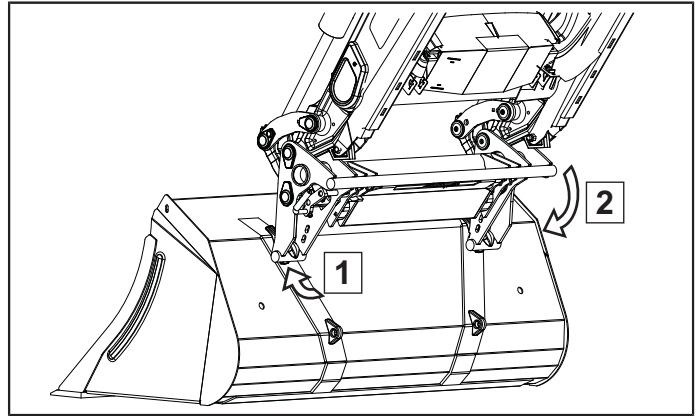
Position the tool carrier under the implement hooks, raise the loader and opened the tool carrier.
